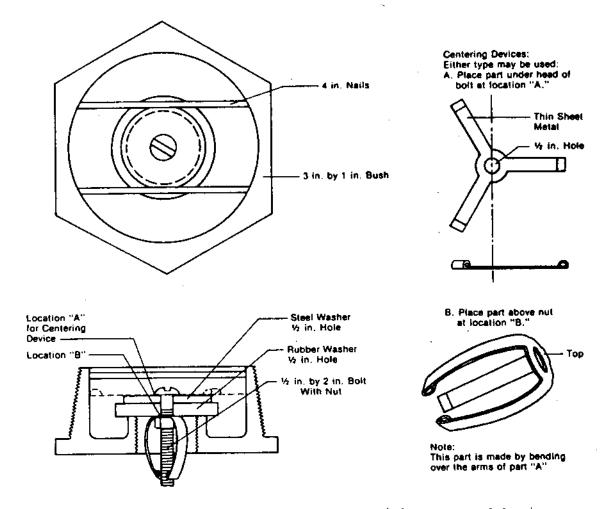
Check valve for hydraulic ram. (The purpose of the centering device—see detail on the right—is to prevent the moving assembly from slipping off-center or to the side.)
